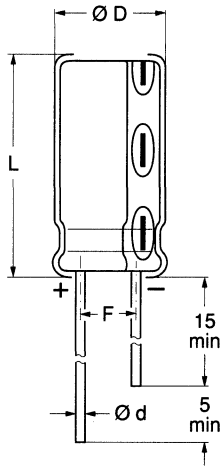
Form CA, long leads; see Table 2 for dimensions.
